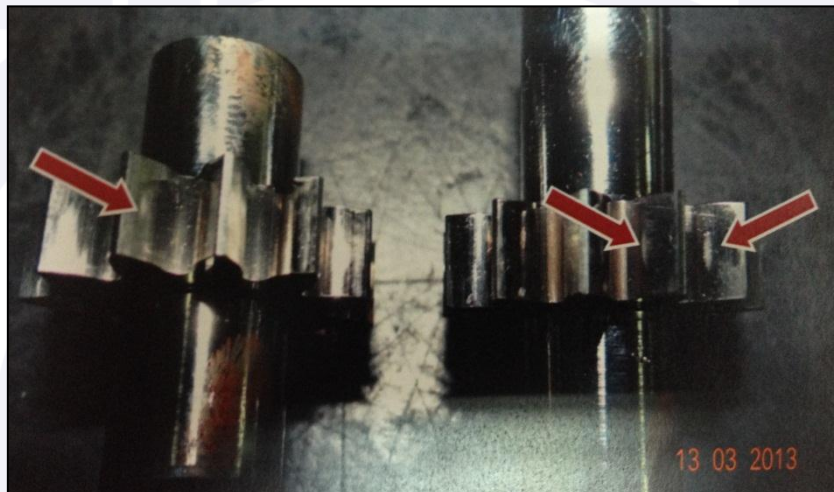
General view of the fuel pump gears with signs of cavitation.
